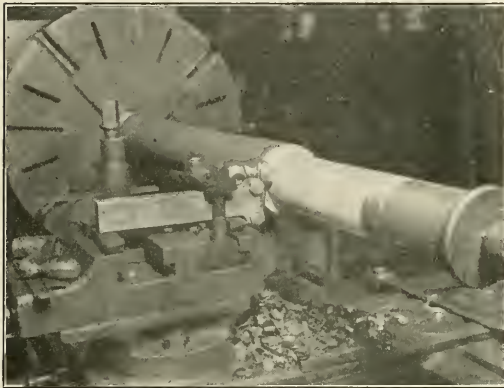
Roughing Tool Taking $\frac{1}{8}$ -In. Cut on Car Axle
